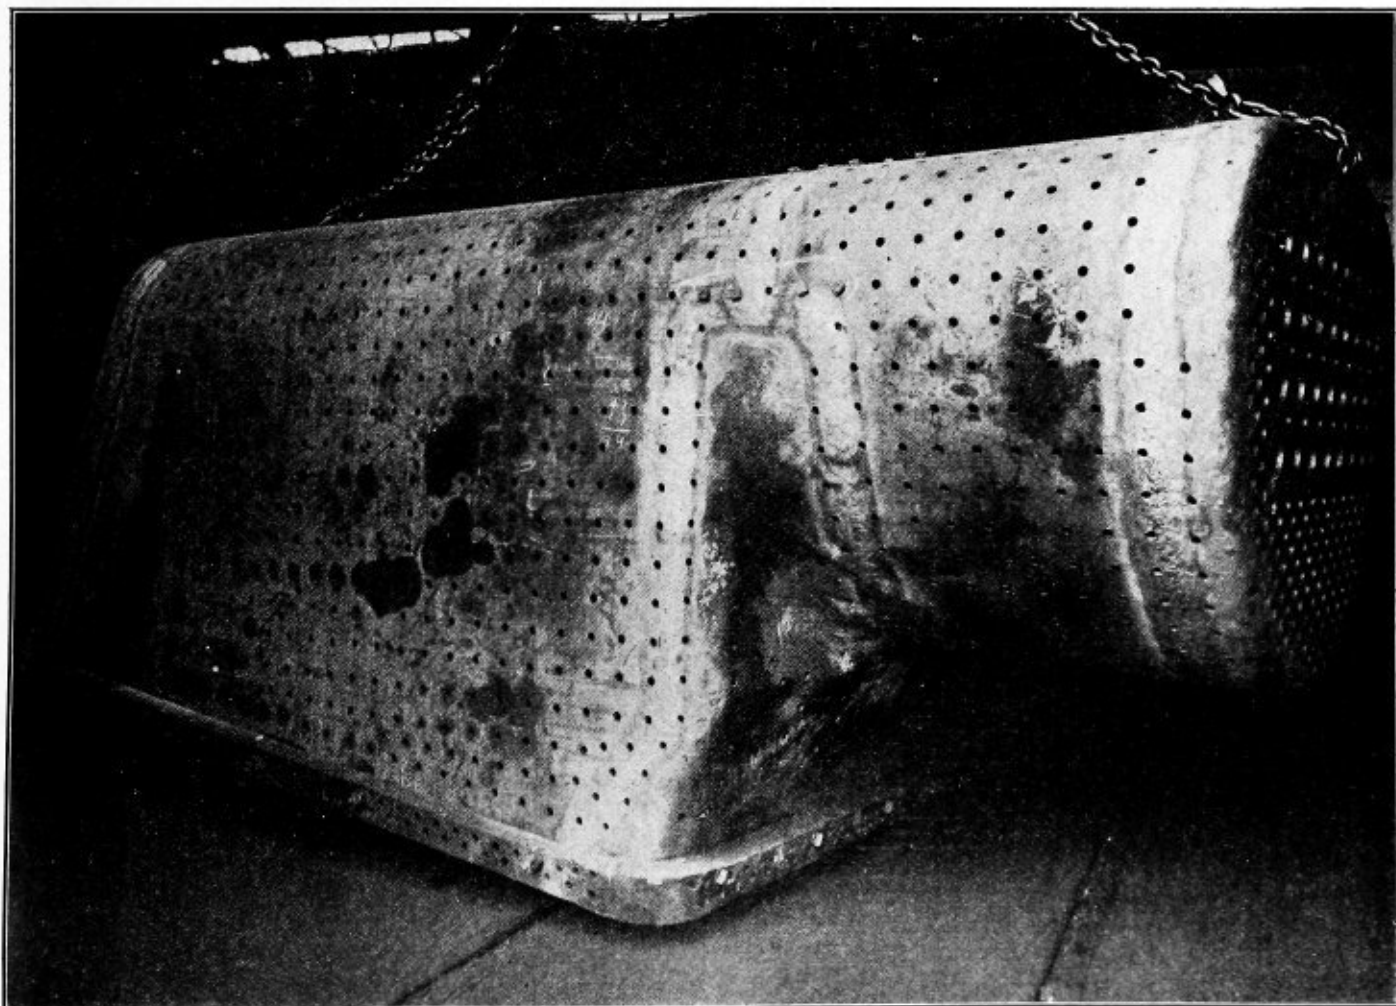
Welded Firebox for Passenger Locomotive of the 4-6-2 Type, Designed to Carry a Working Pressure of 215 Pounds, with a Factor of Safety of 4.43
